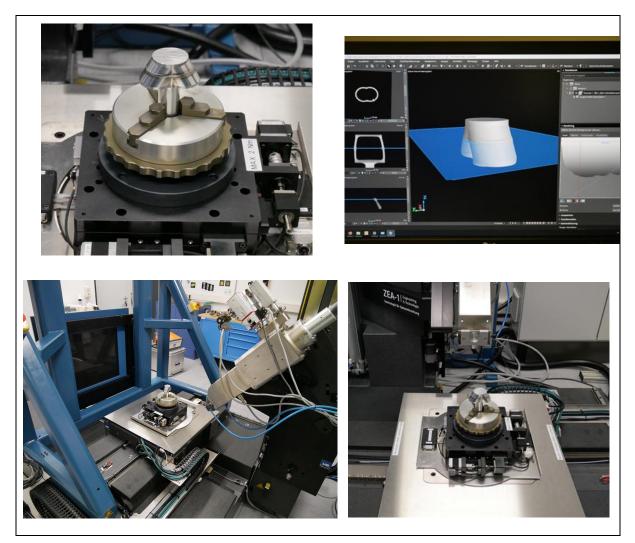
Welding sample of the hydrogen vessel on the CT machine
